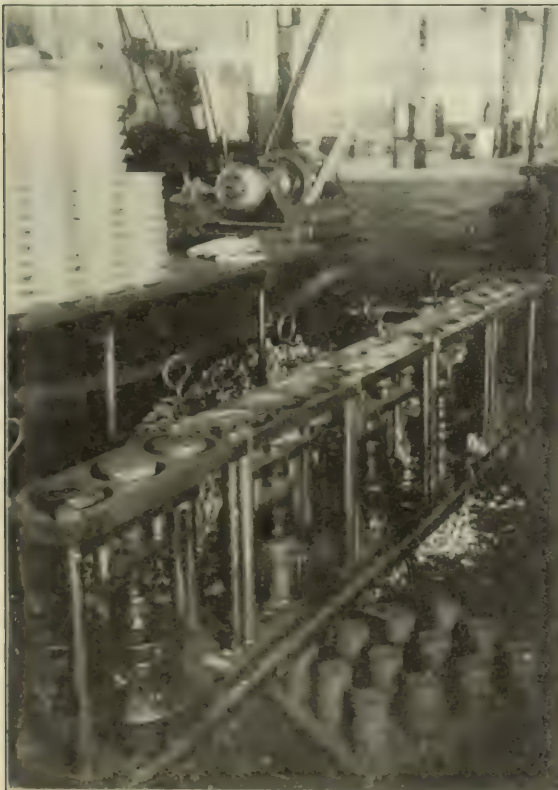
Molds for Pouring and Machine for Finishing Piston and Valve Rod Packing Rings.
